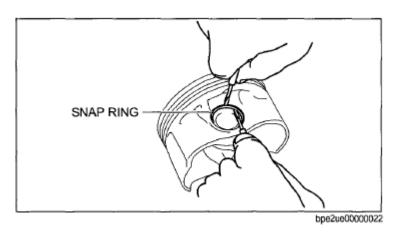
Removing Snap Ring Using Flathead Screwdriver
